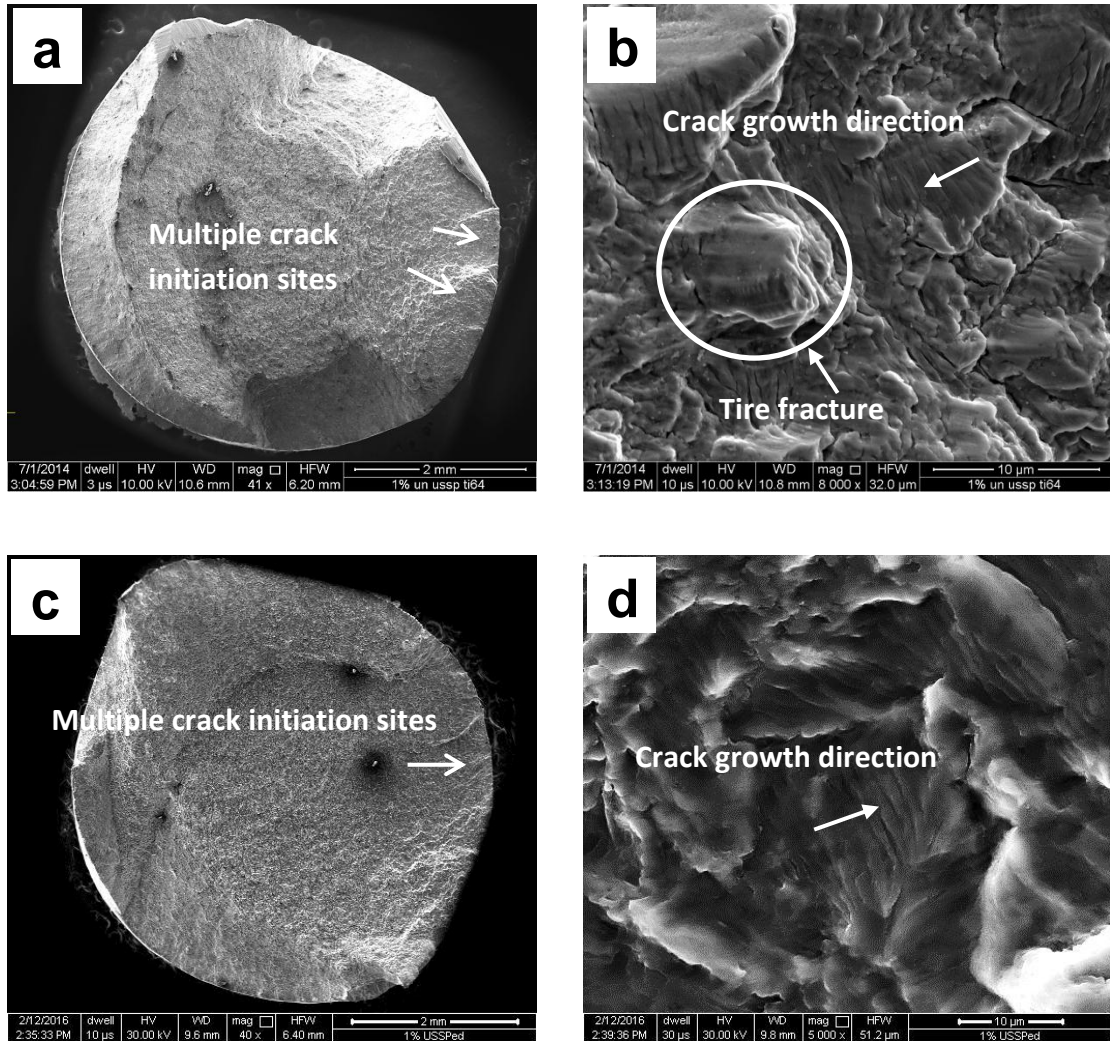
Fractographs showing fracture surfaces of the specimens tested at $\pm 1.0\%$ strain amplitude: (a, b) non-USSPed and (c, d) USSPed.
